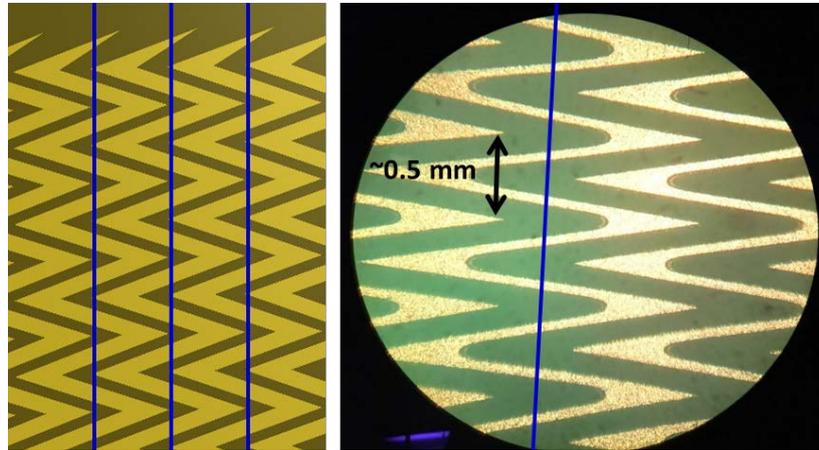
Left*: Zoomed view of the first modified zigzag structure design. *Right*: microscope image of actual zigzag strips produced by a PCB factory. Blue lines indicate strip centers.
